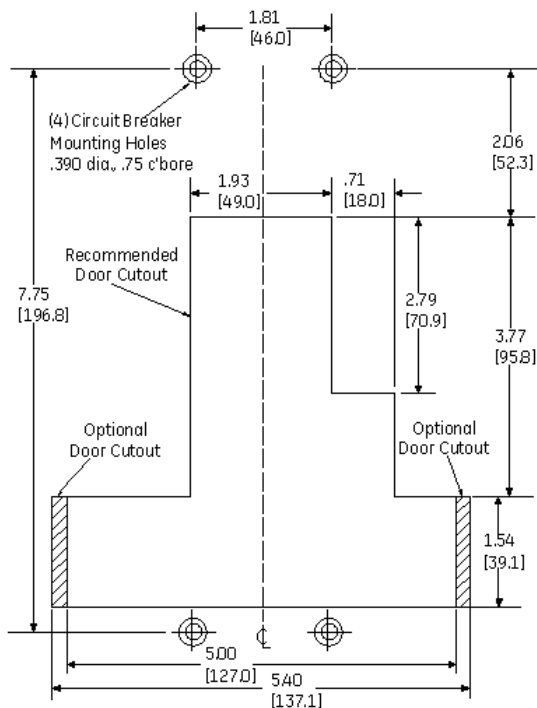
Mounting Hole and Escutcheon Cutout Pattern in/(mm)
